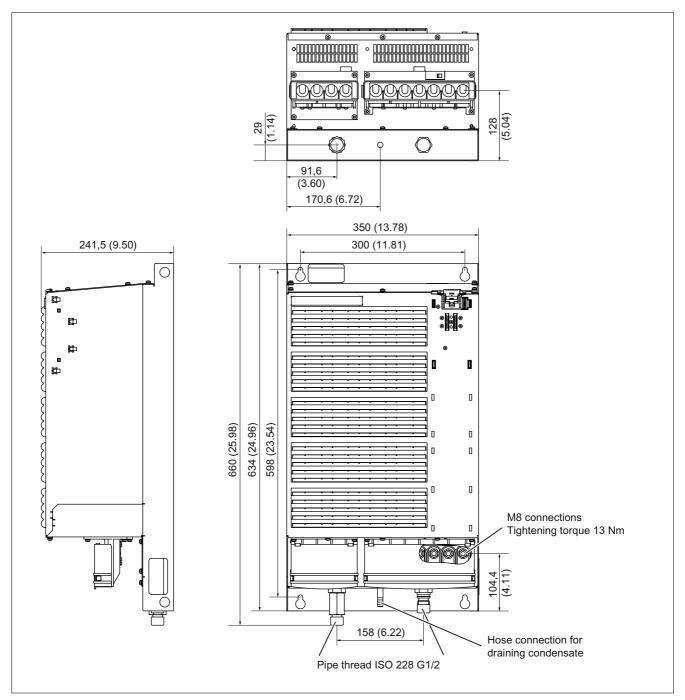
Dimension drawing of Liquid Cooled Power Module PM340, frame size FSF, all dimensions in mm and (inches)
